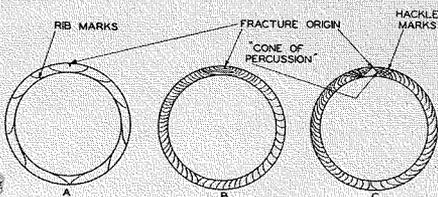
Star-crack bulb fracture produced by impact-type shock.
